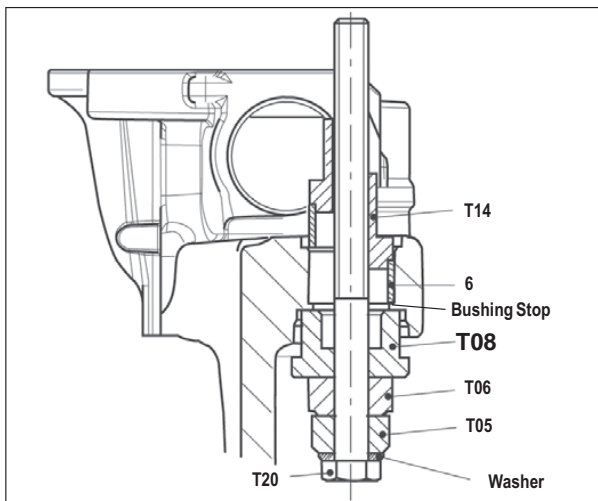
GUIDE PIN BUSHING INSTALLATION
